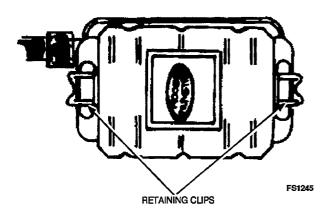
6. FUEL FILTER ASSEMBLY
